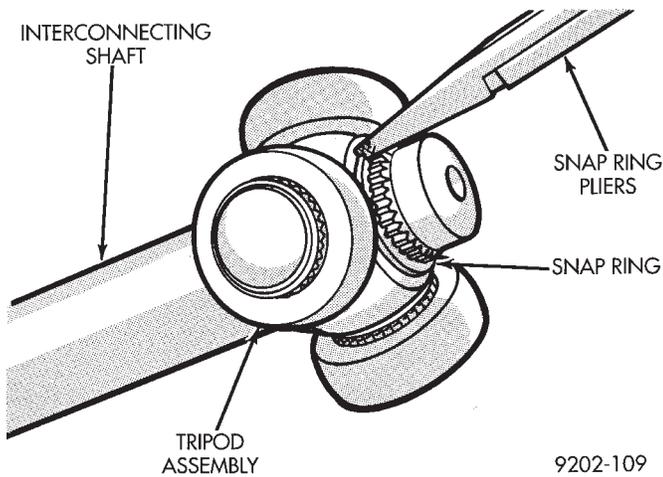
Removing Outer Tripod Retaining Snap Ring (G.K.N.)
